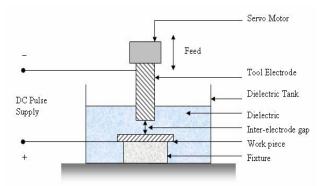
Schematic of an Electric Discharge Machining (EDM) machine tool.
